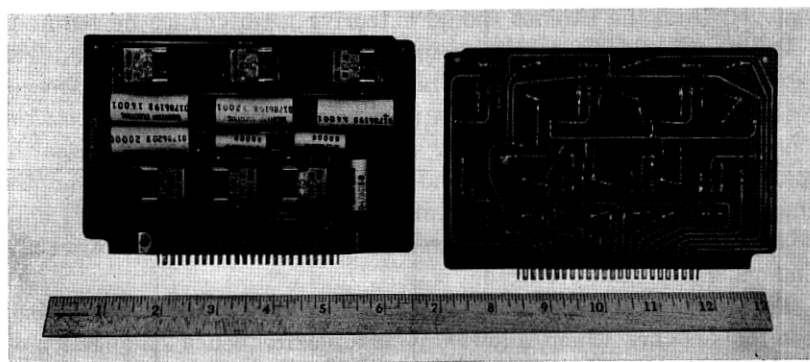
Standard plug-in card: (a) component side, (b) printed wiring side.
